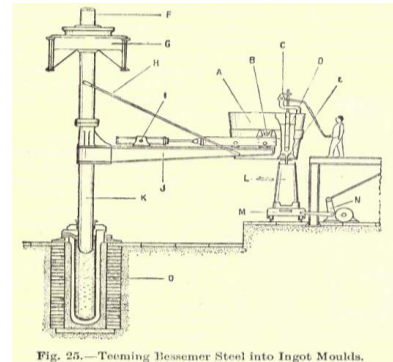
Teeming Bessemer Steel into Ingot Moulds.
